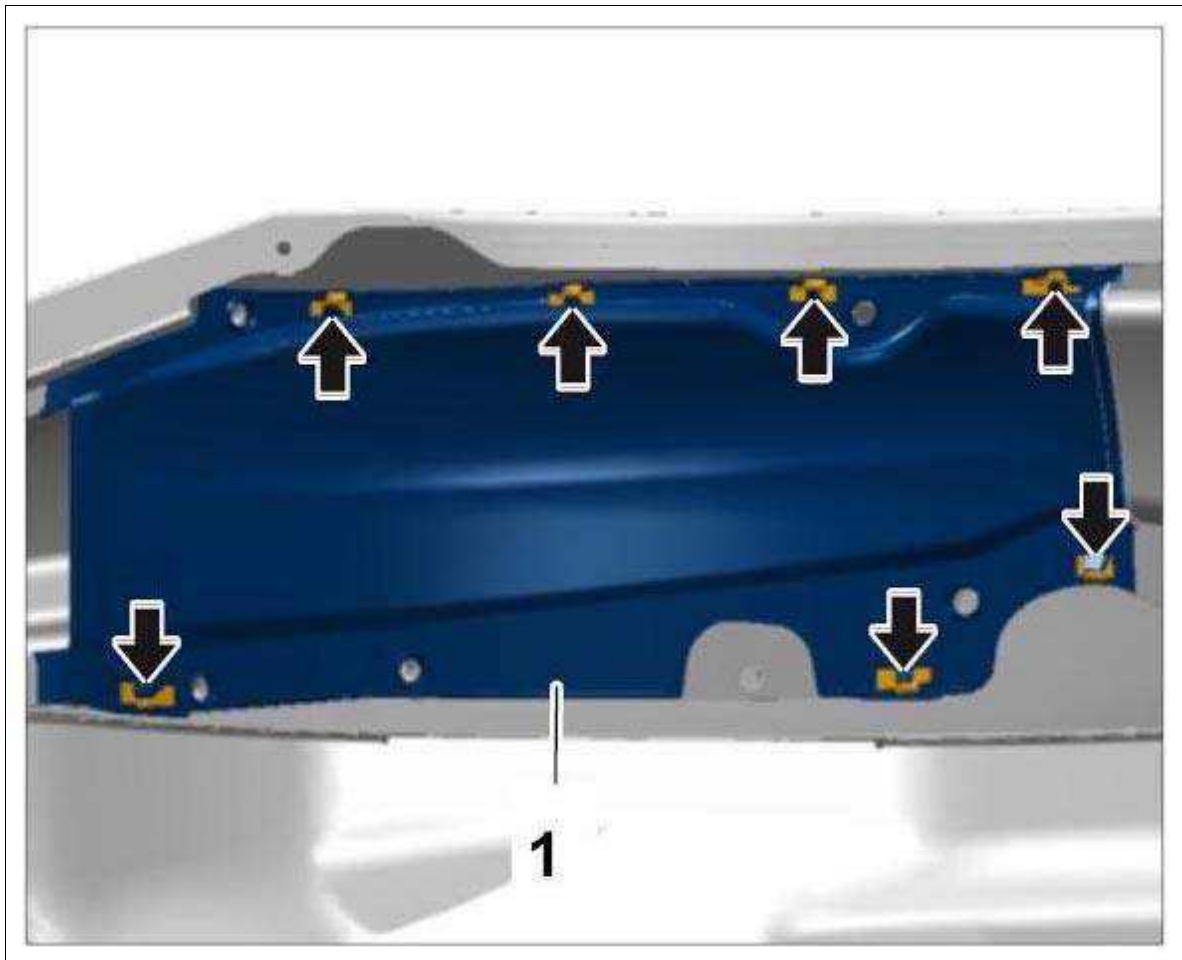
Identifying Air Guide In Rear Wheel Housing Screws
